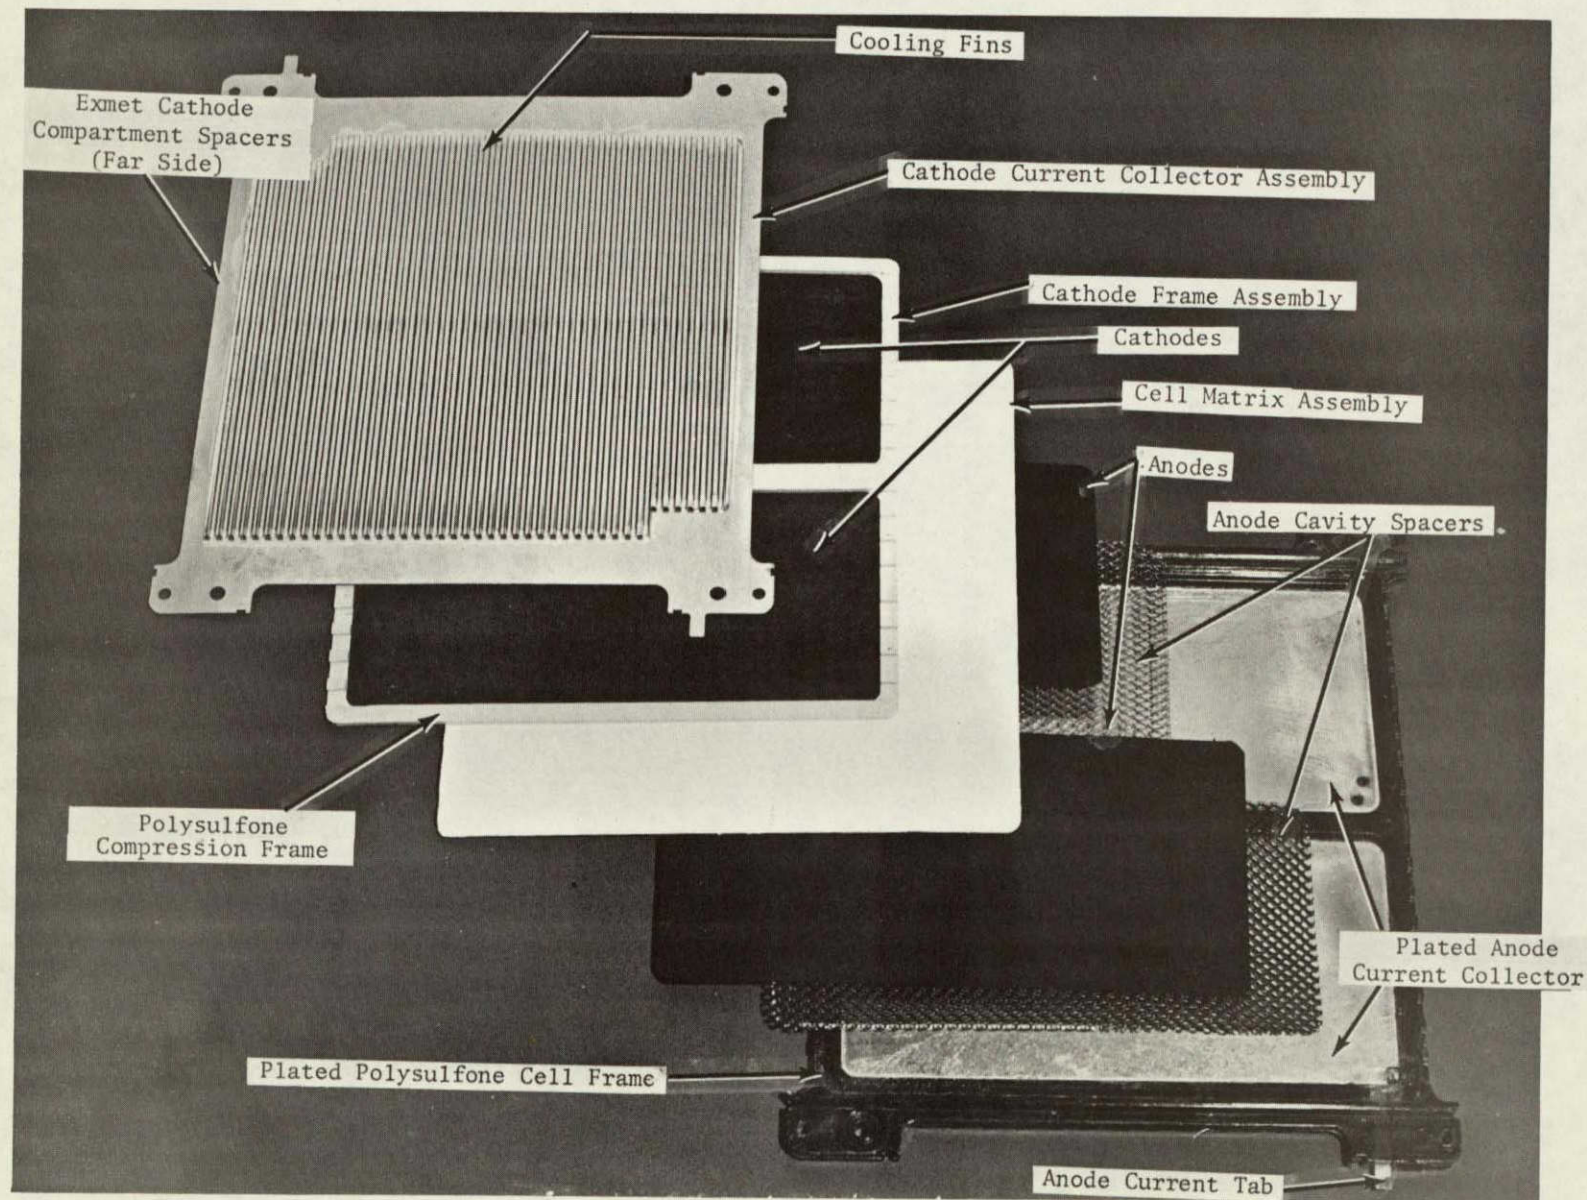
AEDCM CELL PARTS AND ASSEMBLIES
